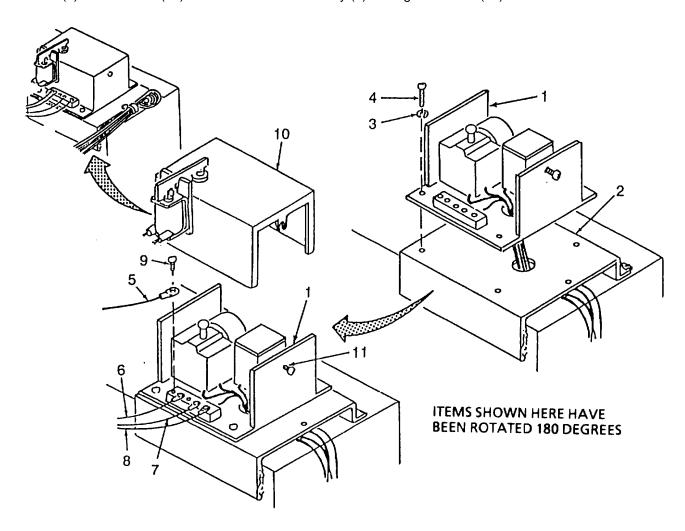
Combustor Control Relay Installation (Sheet 1 of 2)
